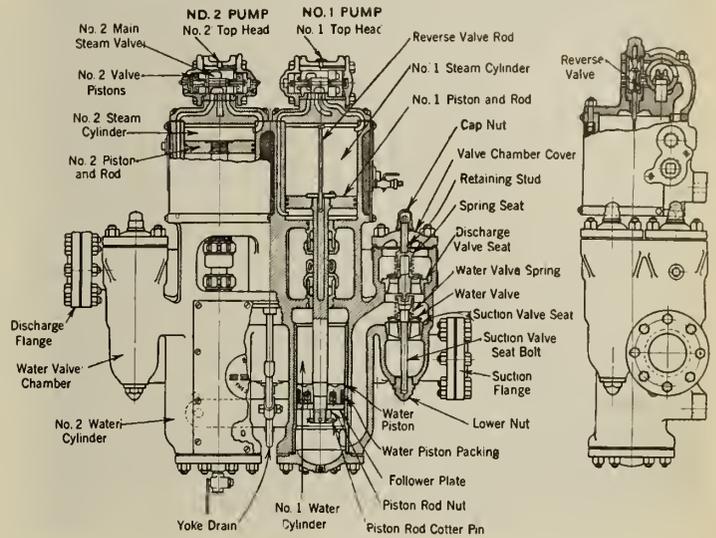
Details of Two-Cylinder Elesco Pump.
